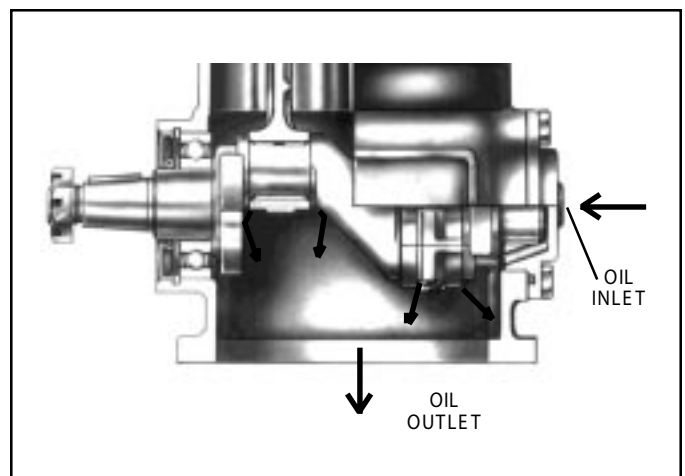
LUBRICATION (BASE MOUNT MODEL SHOWN)
